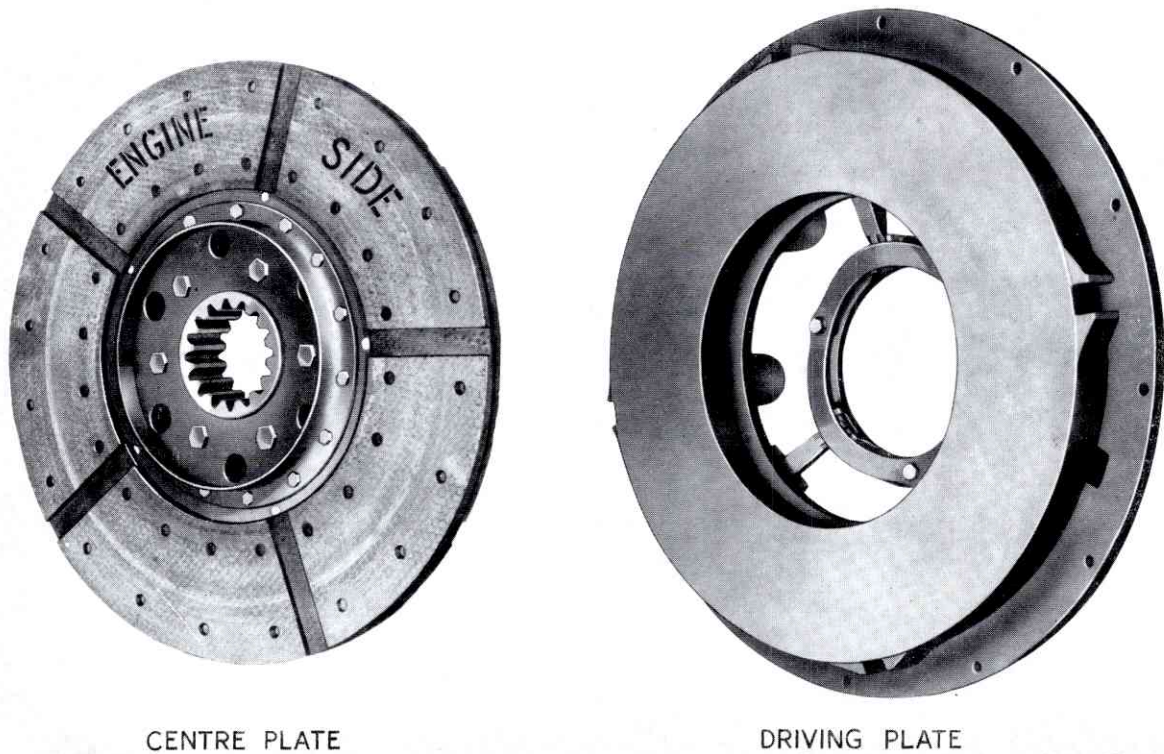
EXPLODED VIEW OF THE CLUTCH
